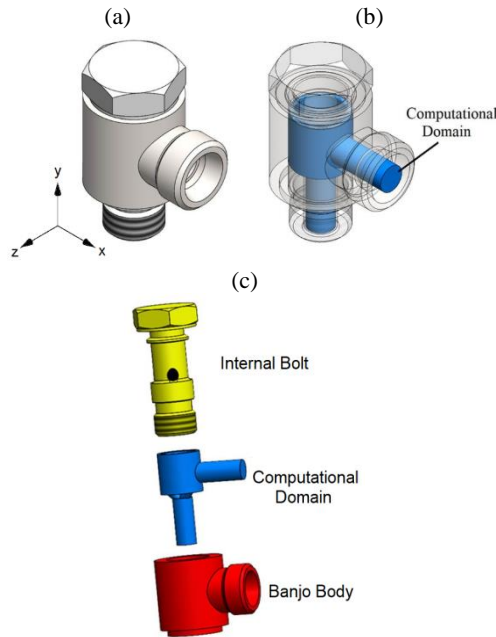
(a) 3D CAD model, (b) computational domain, and (c) exploded assembly of the banjo elbow.
